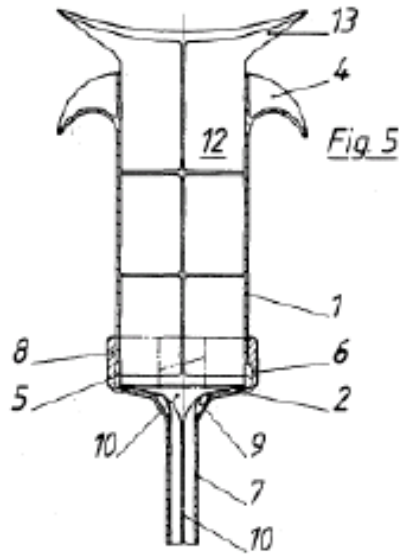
is a partial view of Müller's injector, which includes four elements: (1) cylinder tube 1 defining a volume of about 125 cc for receiving bone cement; (2) nozzle element 6; (3) ram 10; and (4) piston 12. Ex. 1005, 2:46–54. With nozzle element 6 removed, the injector can deliver “a relatively large quantity of bone cement . . . under low pressure.” *Id.* at 1:57–61. “[W]ith the nozzle element attached, the injector can be used to inject relatively small quantities of bone cement at a high pressure.” *Id.* at 4:4–8 (emphasis added). Müller describes the high pressure injection as follows:
